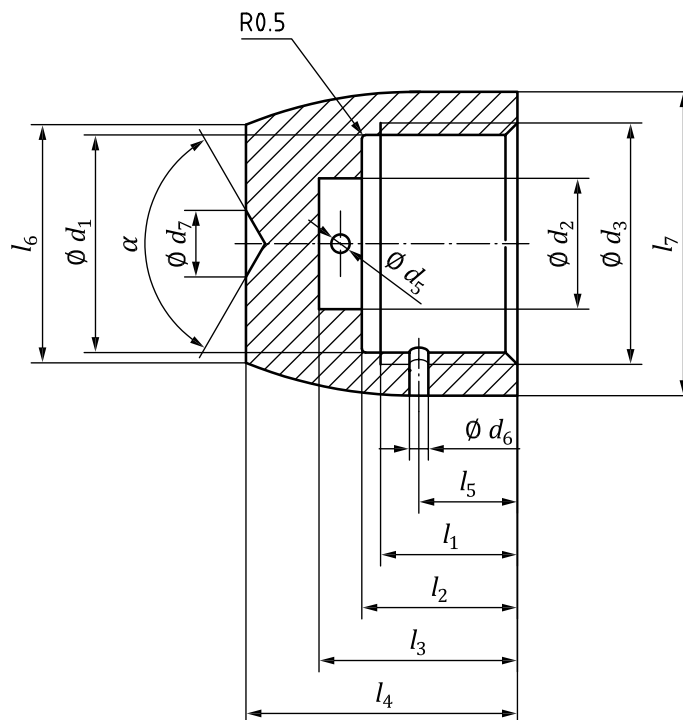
Threaded valve outlet for the 232 bar adaptor connection
